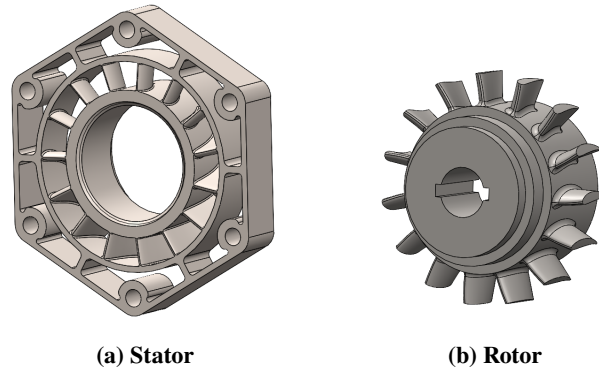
Custom Designed Inconel 718 and 316L Stainless Steel Stator (a) and 303 Stainless Steel Rotor (b)
